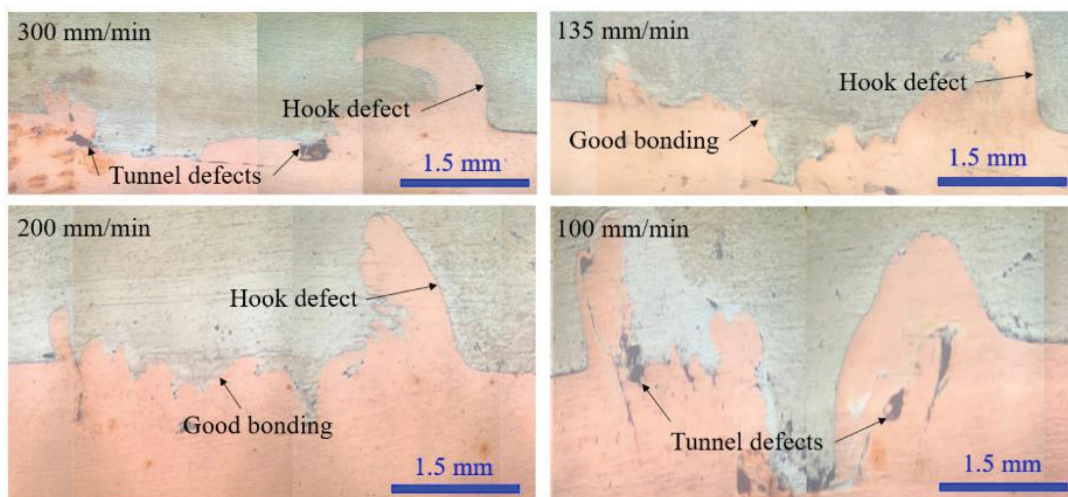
Welding interface between C1100 and AA6061 produced by various welding speeds.
